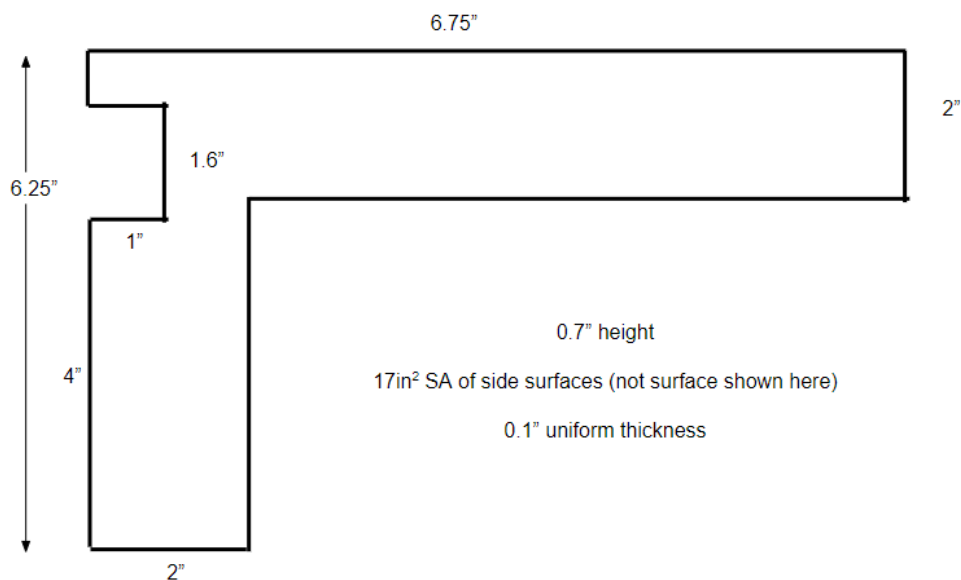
Glue Gun Housing Dimensions for Purposes of the Quiz Problem
